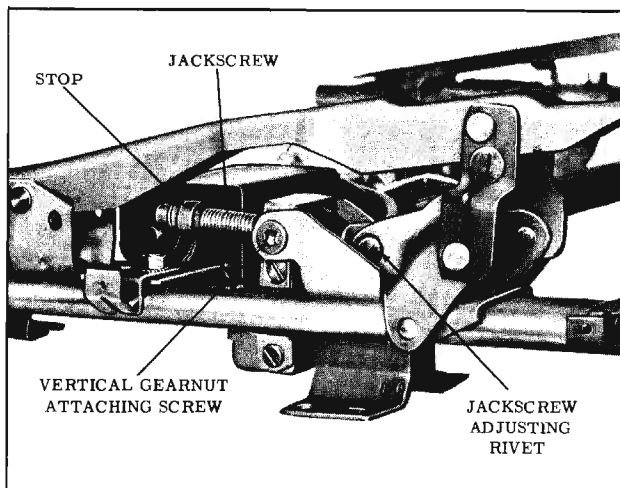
Bucket Seat Adjuster (Outboard)
